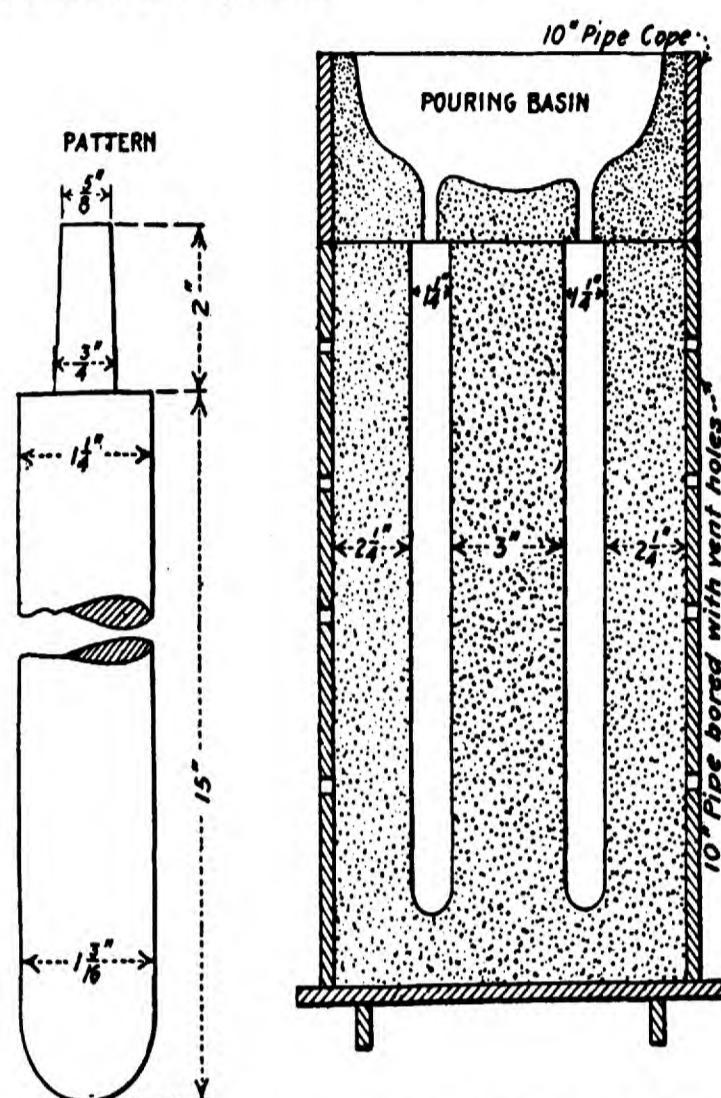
Details of Pattern and Mold Required for Arbitration Bars in Testing Gray Iron Casting Material.
